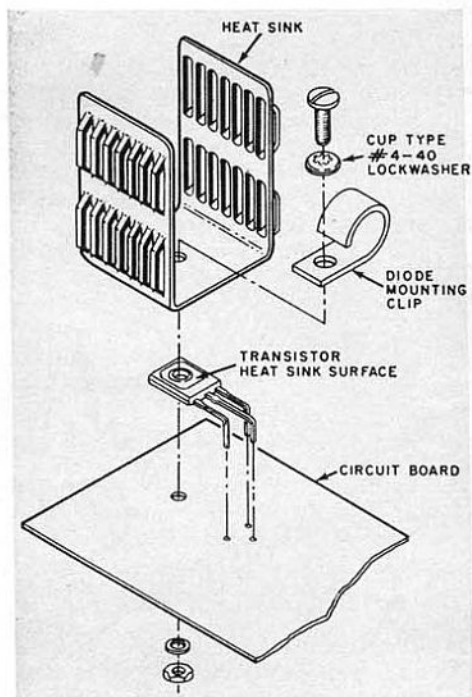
Method of installing each power transistor, heat sink, and diode mounting clamp. The cup-shaped lock washer is necessary to prevent cracking the power transistor when it gets hot after long use.
